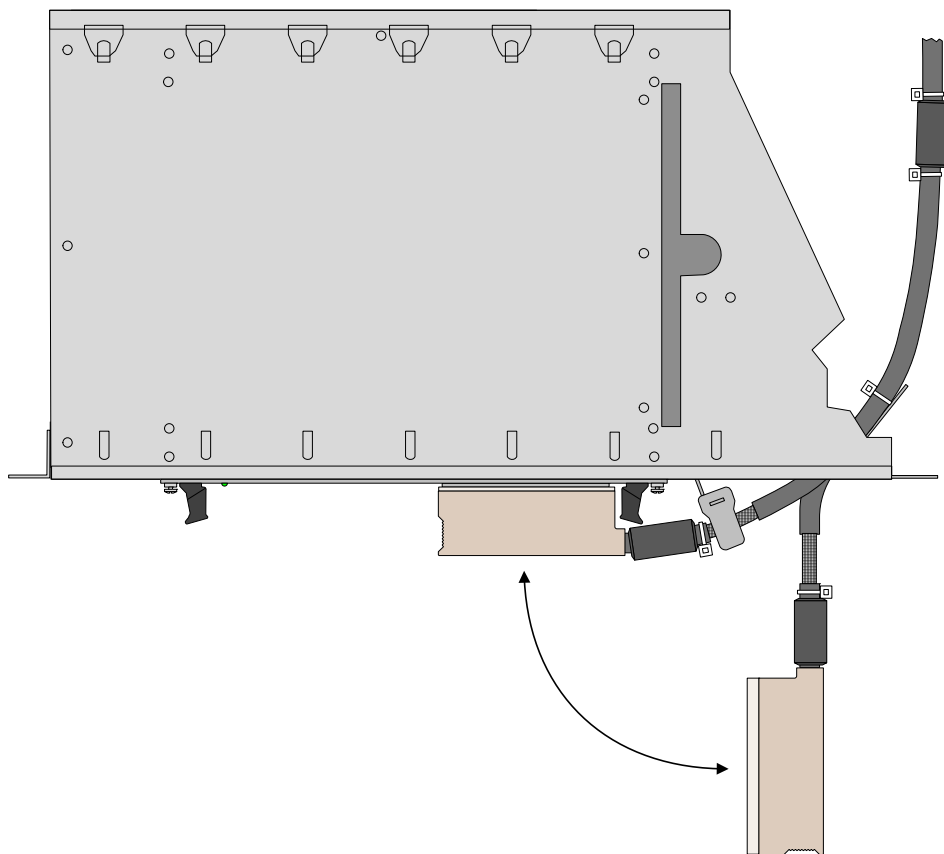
Top view of the cable tray and the cable in XMC23 and XMC22
